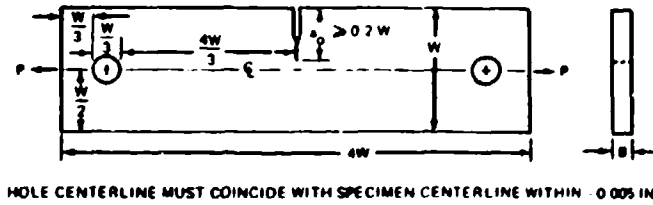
Single Edge Notch Tensile (SENT) Specimen.
